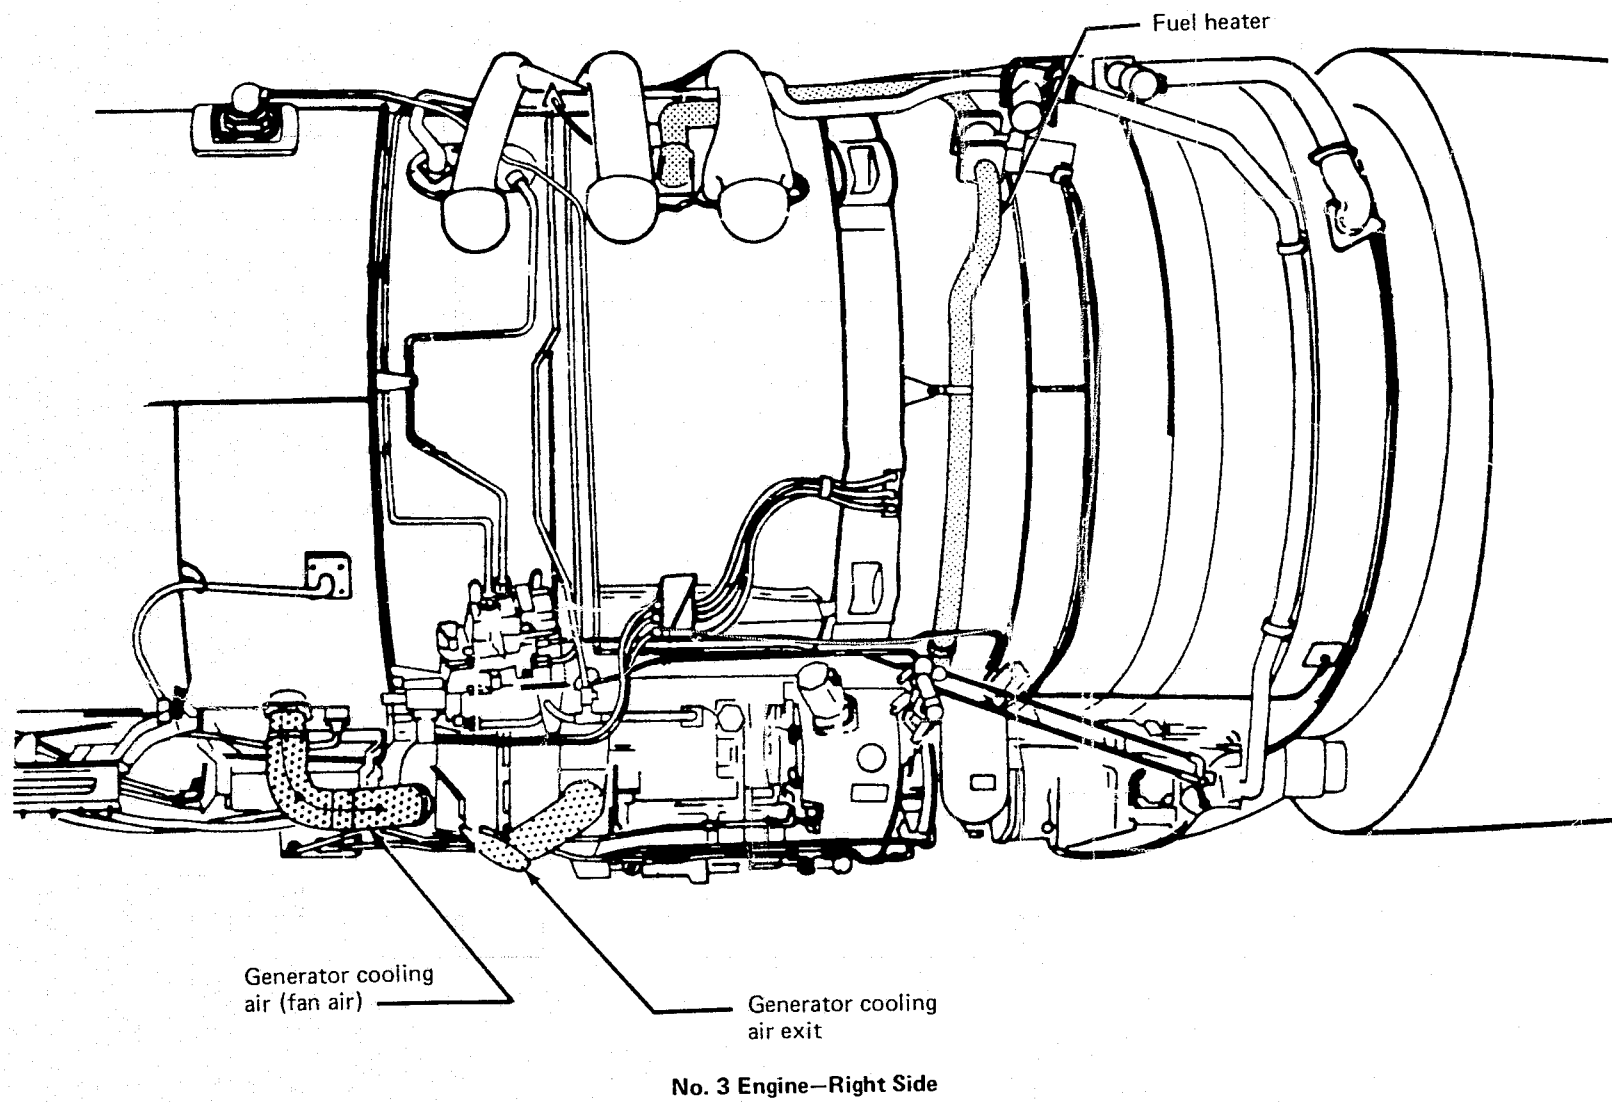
JT8D Refan Powerpack Assembly—Generator and Fuel Heater Bleed
